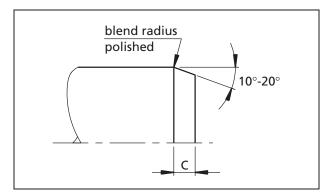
Lead-in chamfer on rod Table LXXII Lead-in chamfers for Turcon[®] Roto Glyd Ring[®]
